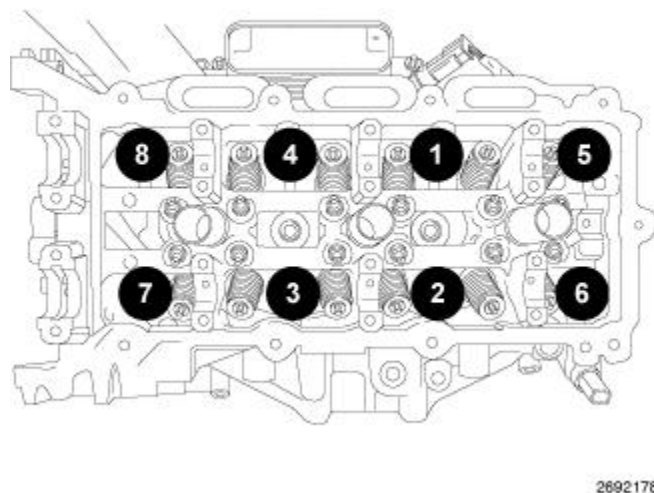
Cylinder Head Retaining Bolt Tightening Sequence - Left
